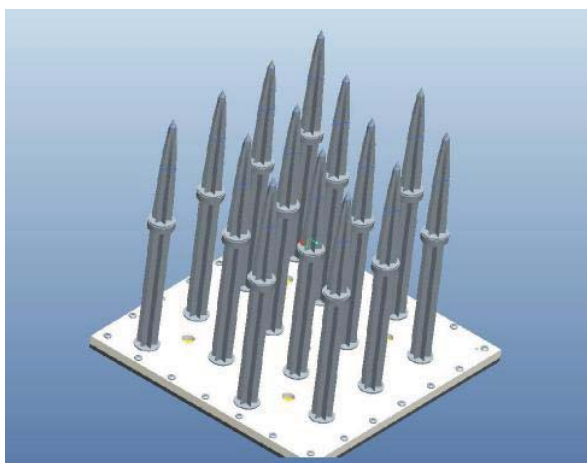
Current baseplate/top-plate design drawing of PCB "blanket"
